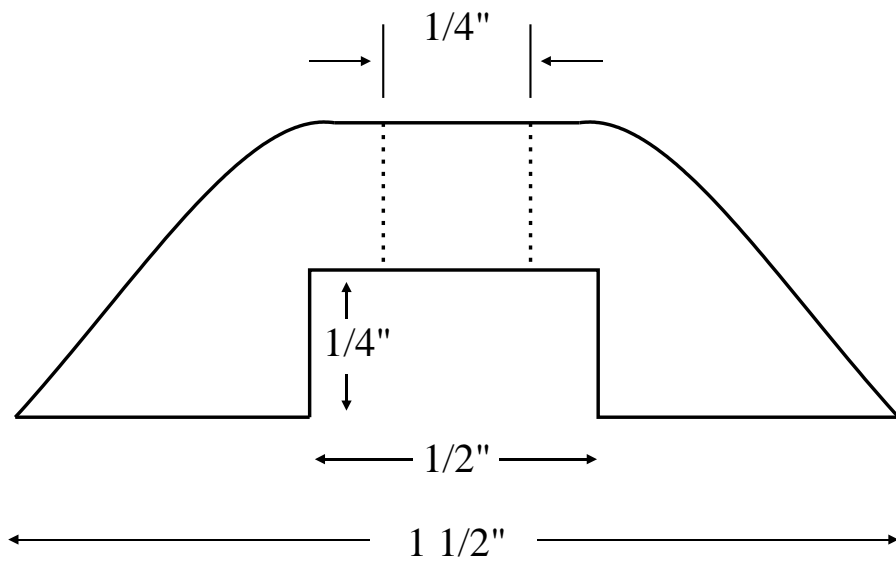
Cross-sectional view and dimensions of wooden trim piece used to mount pressure transducers.
